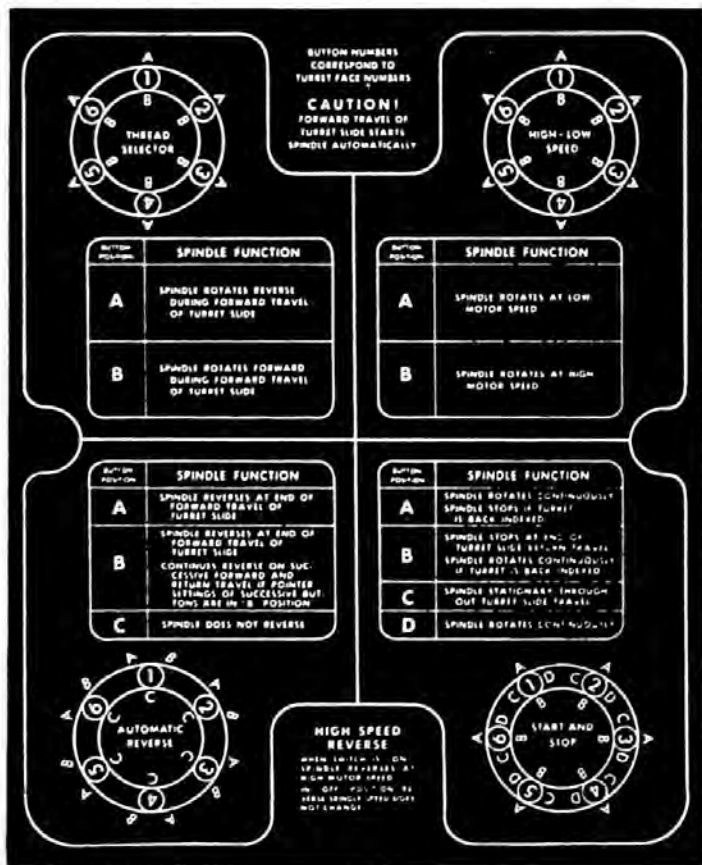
A. Close-up of instruction plate on control drum of 16" electro cycle machine.
